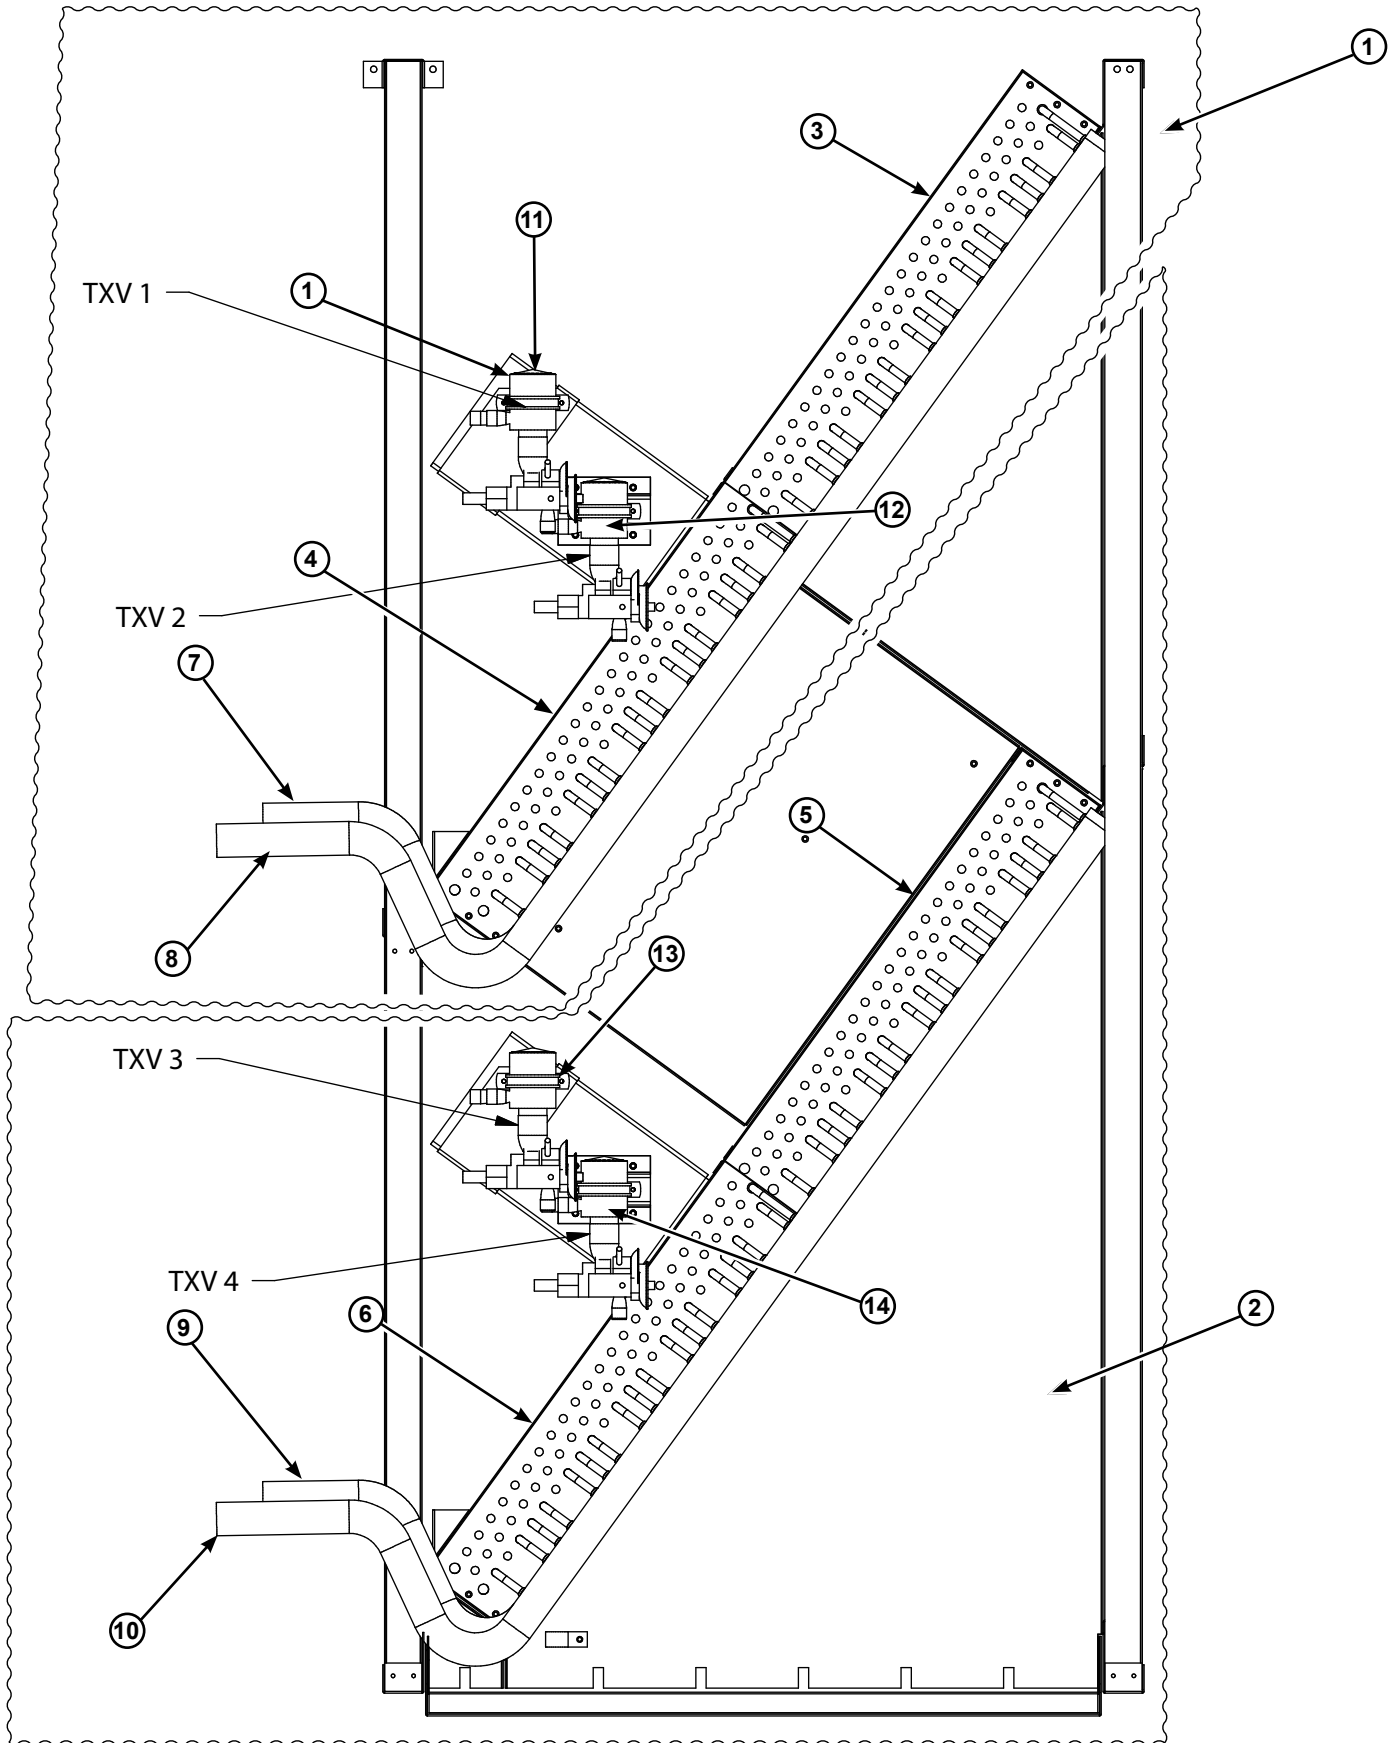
EVAPORATOR COILS, REPLACEMENT SUCTION HEADERS & EXPANSION VALVE ASSEMBLIES
